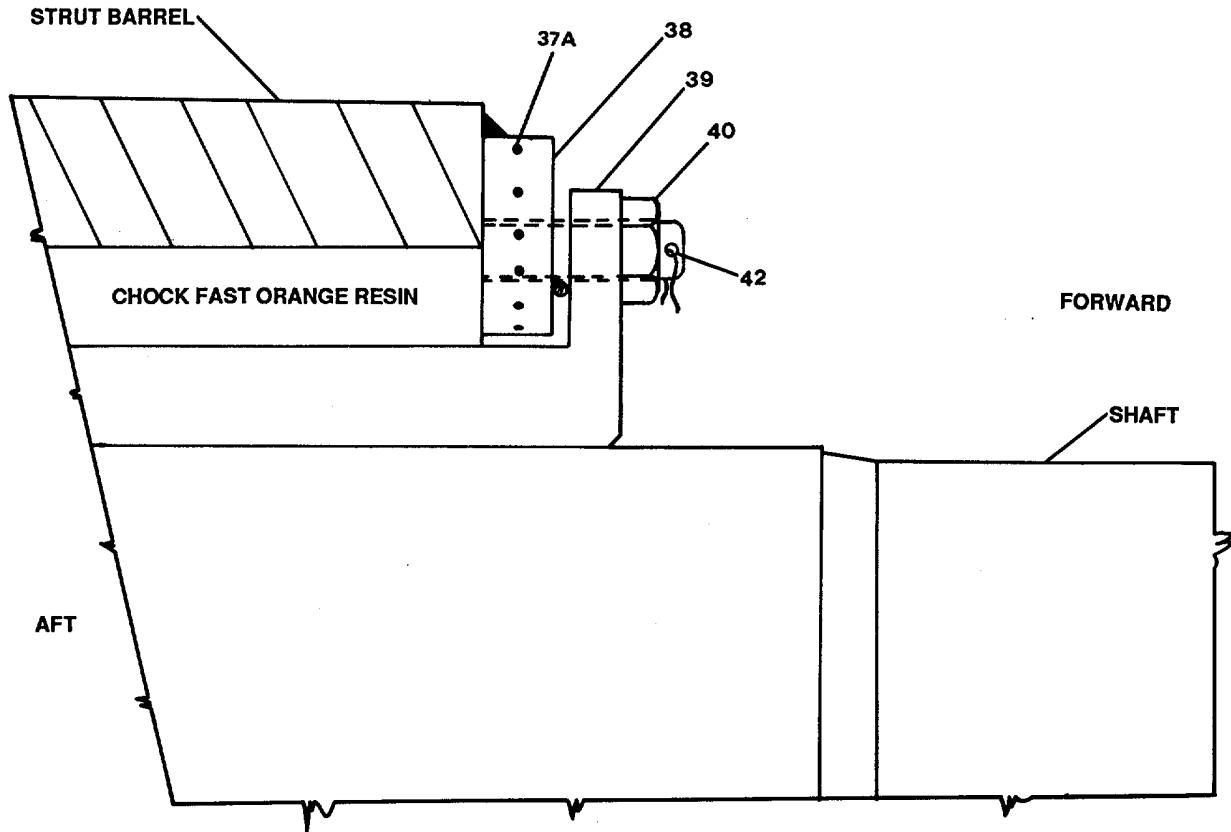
Propeller Shaft Assembly (Sheet 4 of 5).
